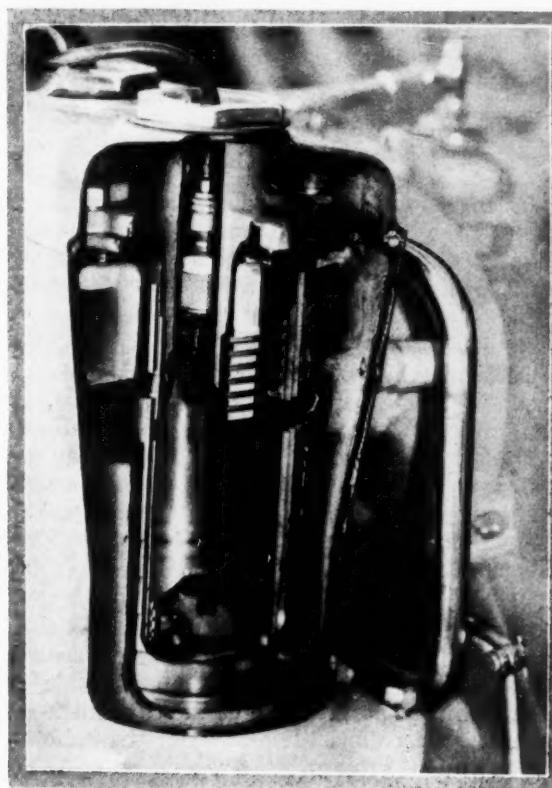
Sectional view of Willys-Knight engine, showing pistons, sleeves, cylinder heads, the unusual type of junk ring, separate cylinder and water jacket heads and the spark plug located in a well
